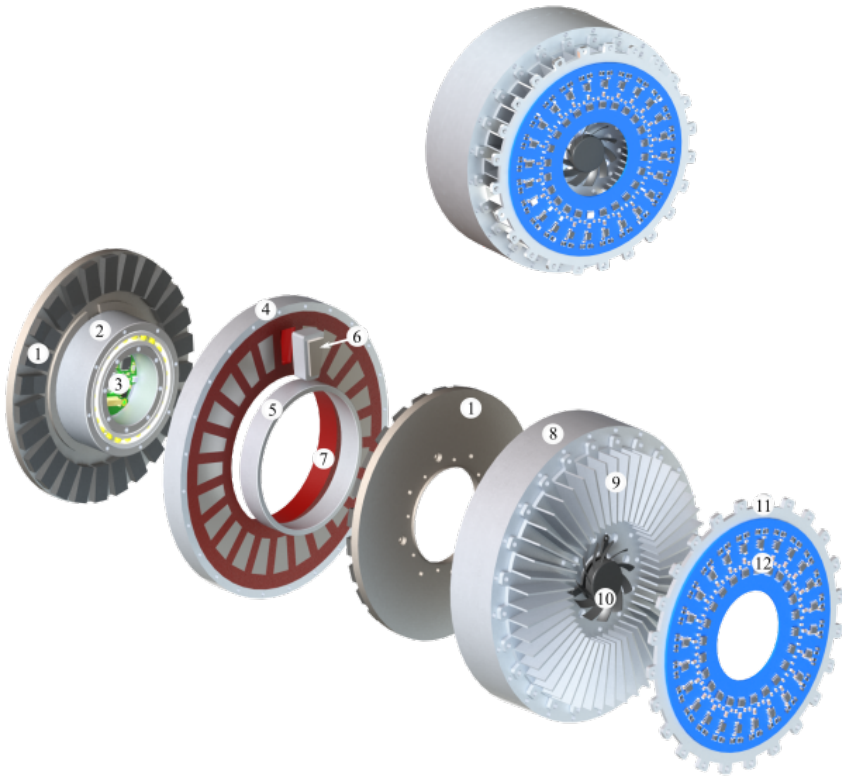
Axial endplate mount Integrated Motor Drive concept: (1) Permanent magnet rotor disc (2) Ball bearings and bearing seats (3) Absolute magnetic encoder (4) aluminum stator housing (5) Thermal end-winding interconnection ring (see Chapter 5) (6) Concentrated winding tooth coil (7) Epoxy potting (8) Housing shell (9) aluminum radially finned heatsink (10) Fan (11) aluminum PCB mounting plate (12) Power electronics drive on Insulated Metal Substrate (IMS) PCB
